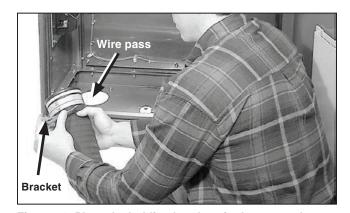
Place the holding brackets in the grooved channel of the conduit.
